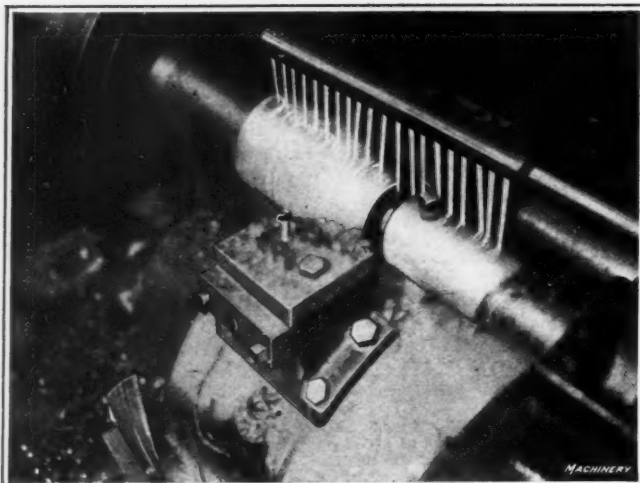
Pipe with Series of Holes to distribute Coolant to Tools on Shell Turning Lathe
